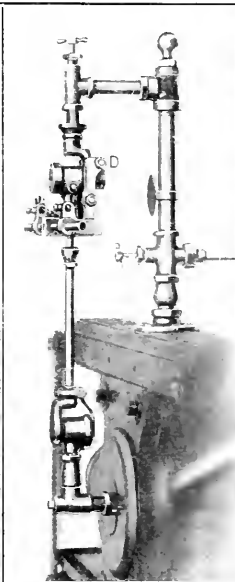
SIDE VIEW OF REDUCING MOTION AND OILING DEVICE
